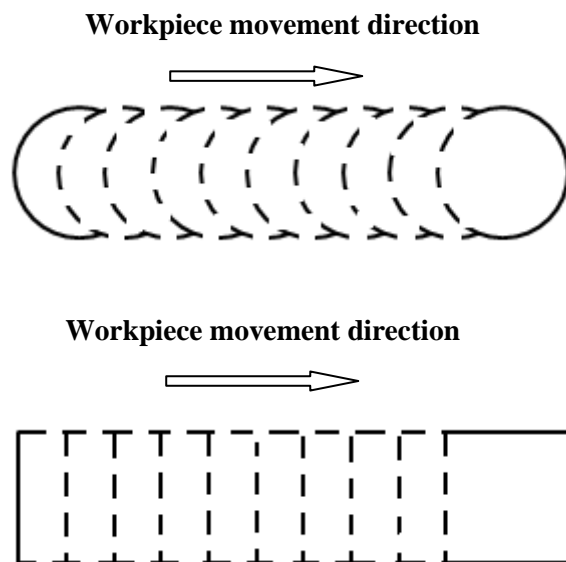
Material ablation during workpiece movement using circular and square masks
